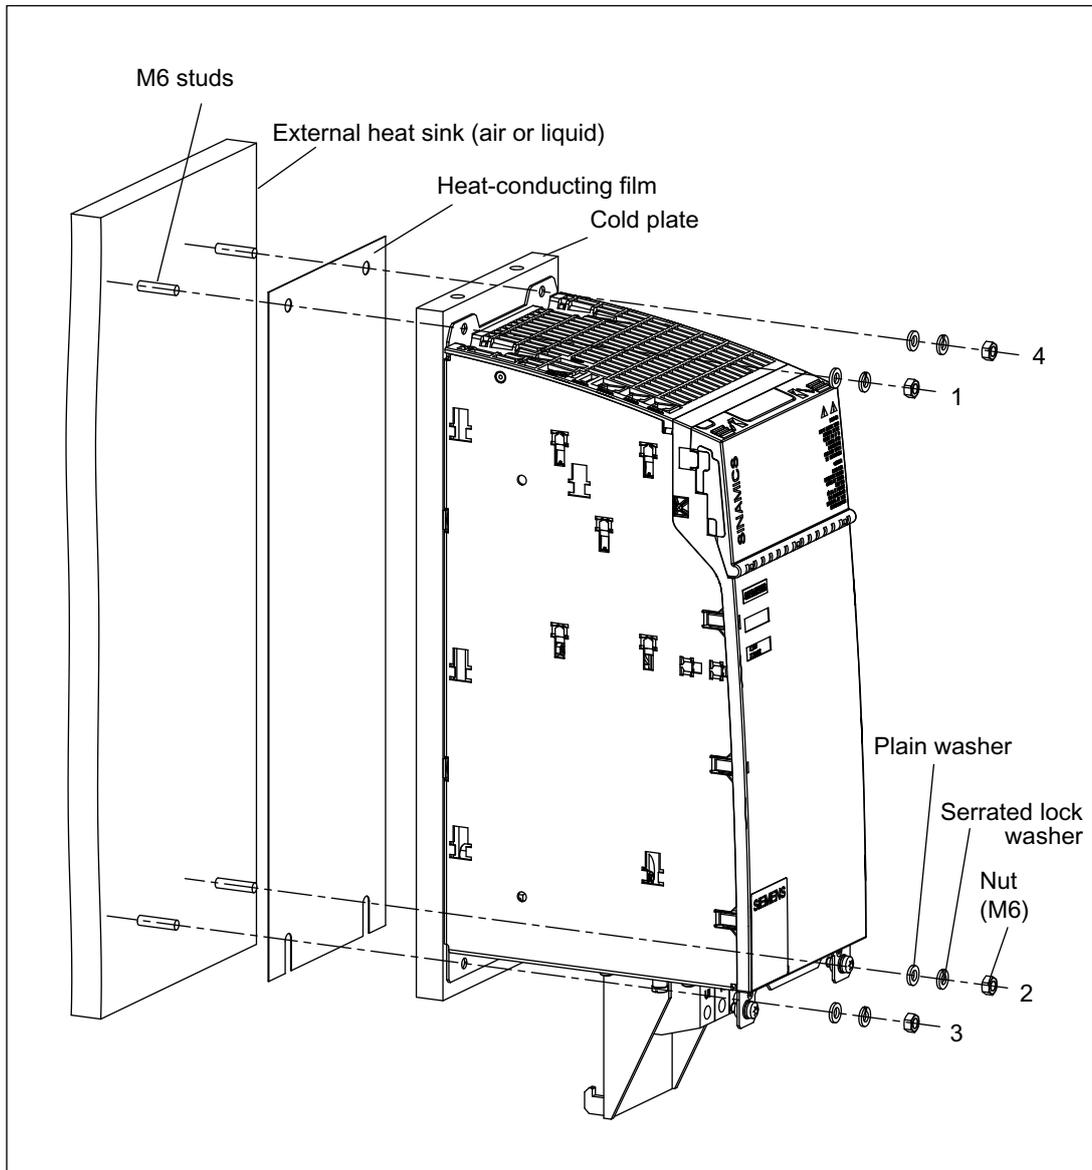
Installation of Basic Line Module 40 kW with external heat sink and heat-conducting film
